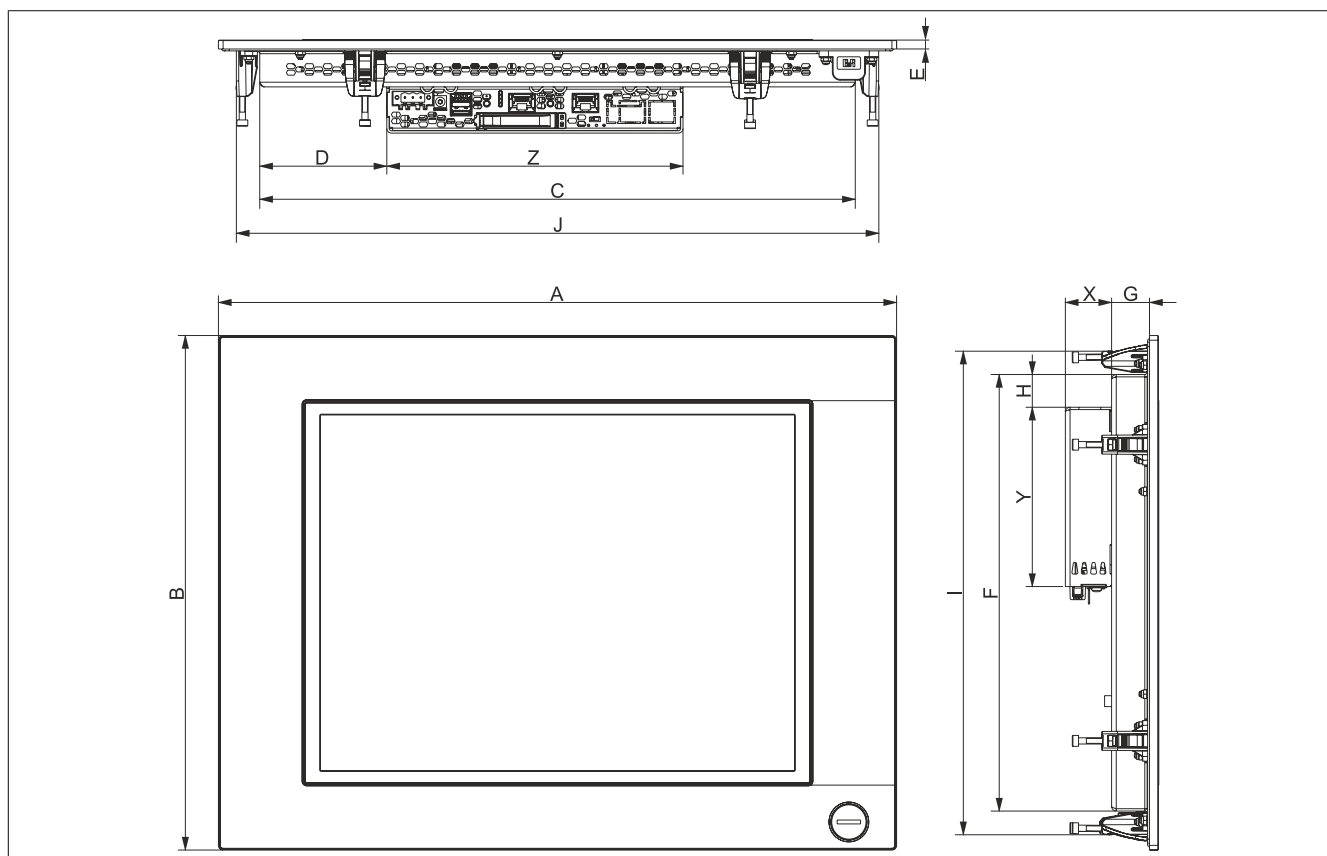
Panel PC 2100 with AP1000 panels with clamping blocks (sample figure) - Dimensions
